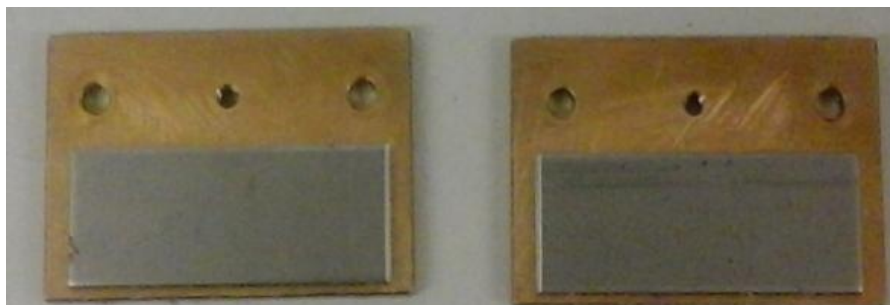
Test samples of the steel sheet are stacked on the plate.
